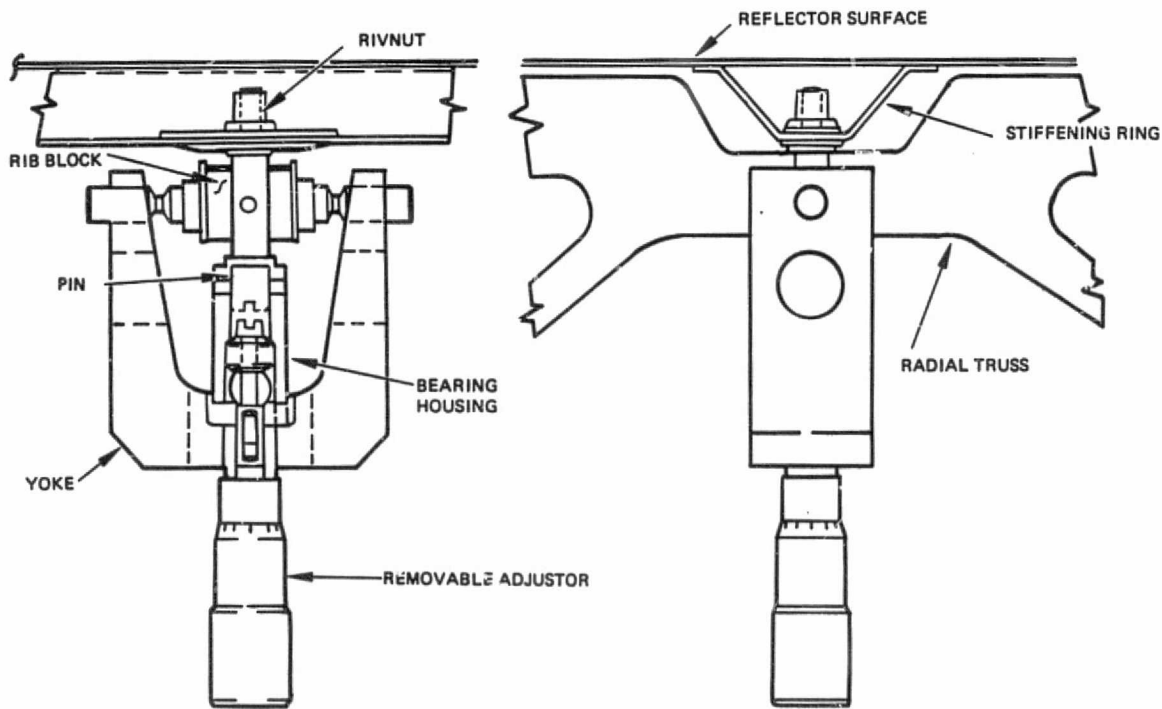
Shell adjustor (used during fabrication and removed after lockout).
